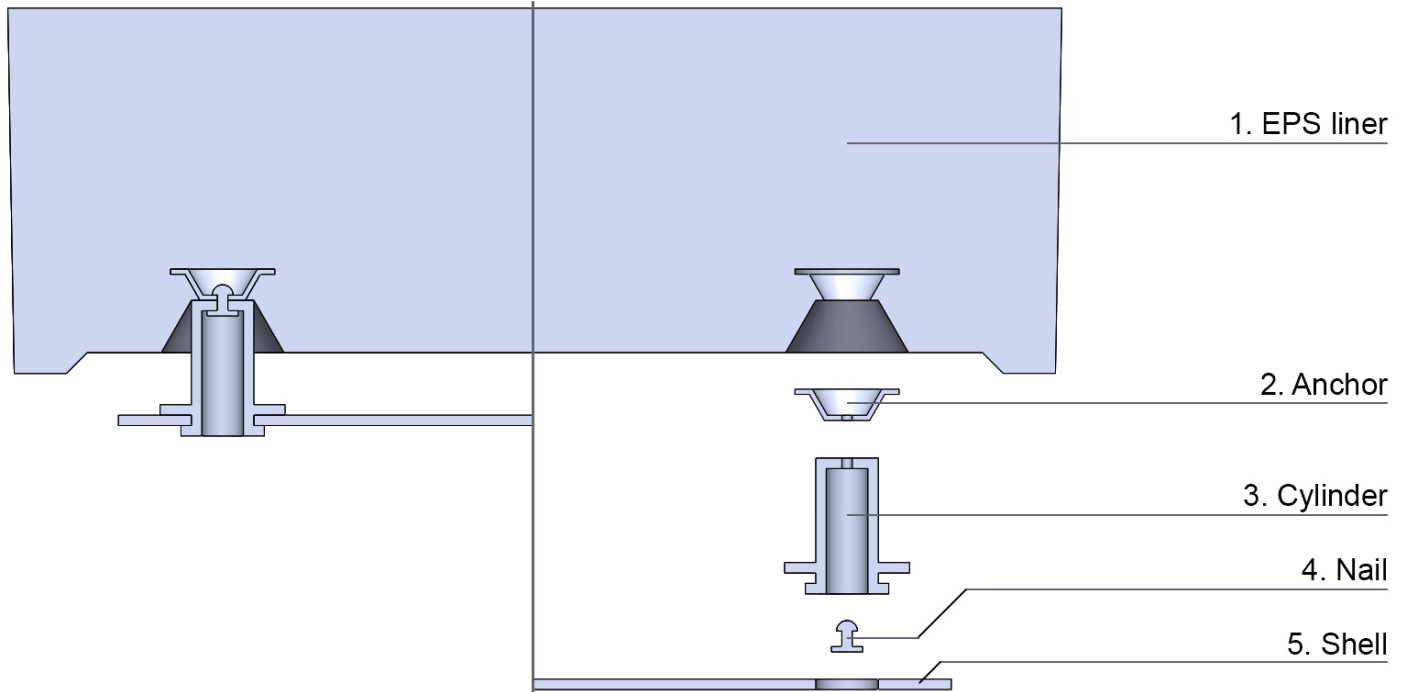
An exploded view showing the parts on the right and how they fit together on the left.
